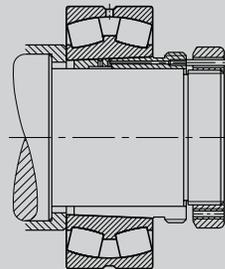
Dismounting of Withdrawal Sleeve by using Hydraulic Pressure
